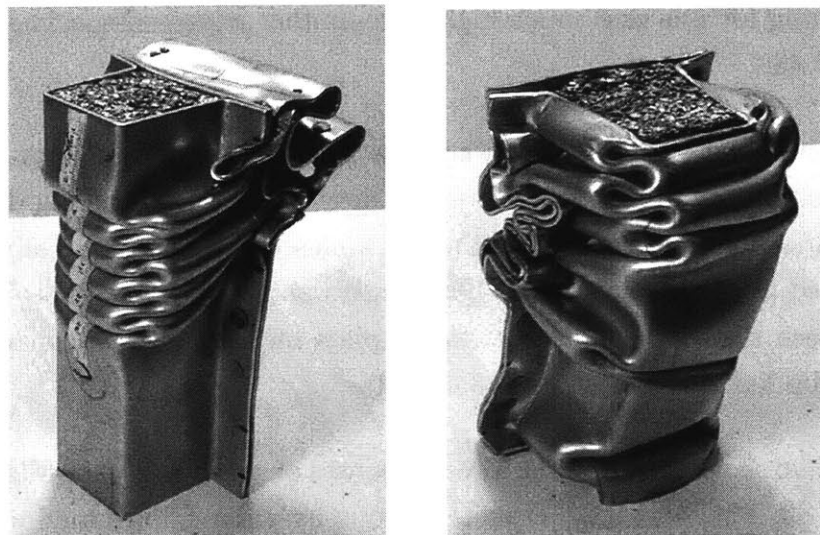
Crush deformation of single-hat foam-filled columns with rivets added. Left: specimen S3. Right: specimen S81
